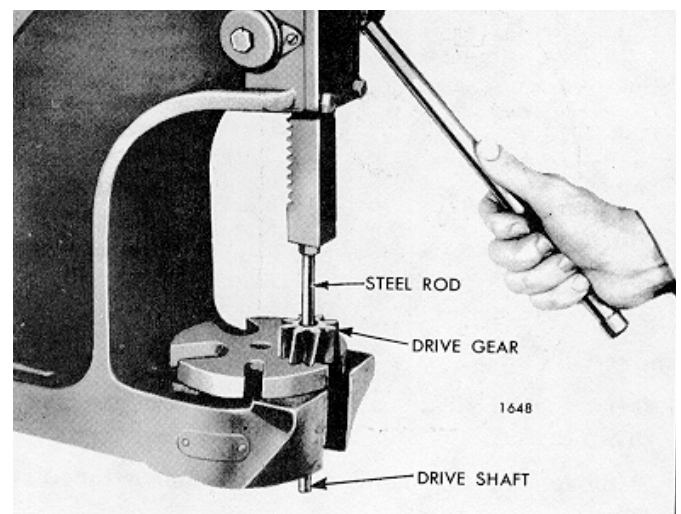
Removing Oil Pump Drive Gear from Shaft
